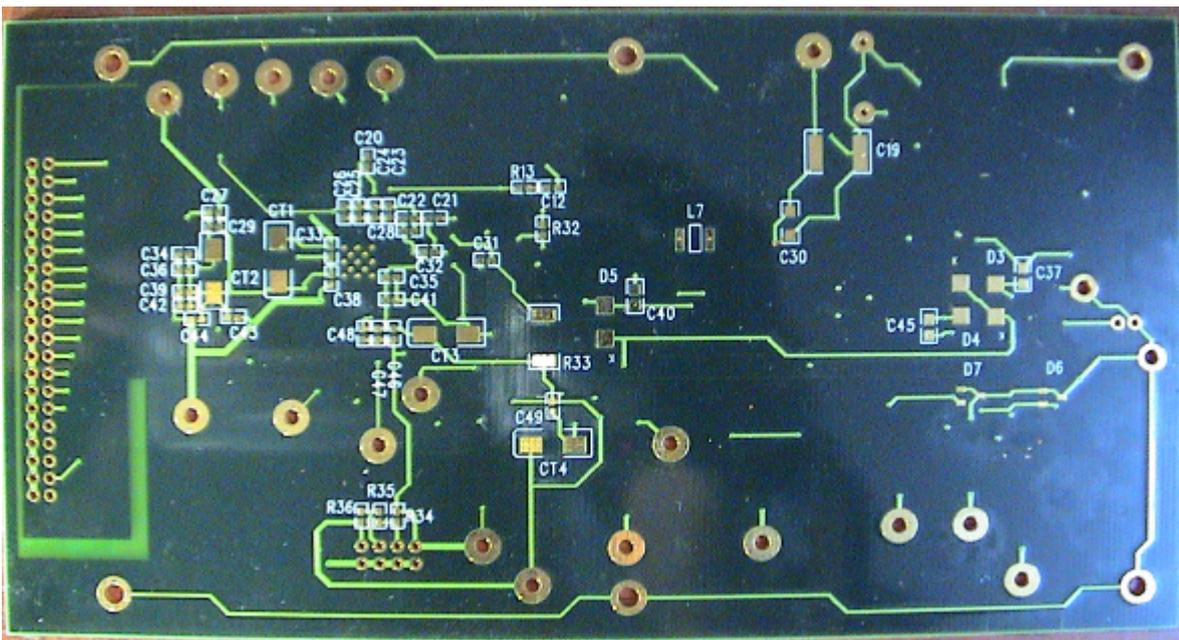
4-Layer Priamos Antenna PCB Bottom-Side.
